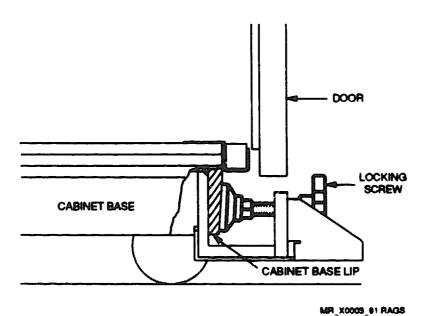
Cabinet Stabilizer Assembly Attachment
